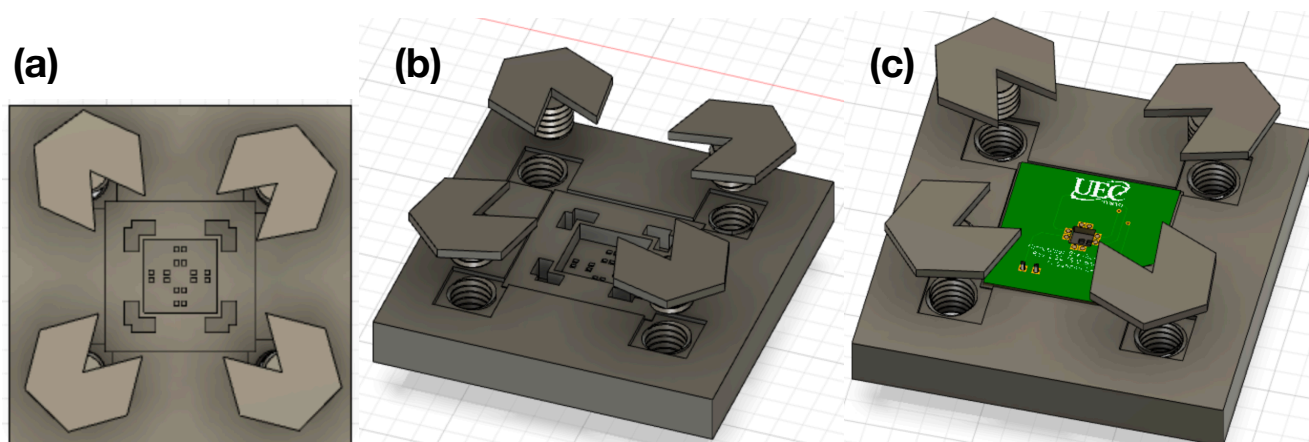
Schematic render of the 3D printed holder for mechanical alignment of the substrate with the PCB. (a) Top view of the holder with four notched, wide base screws, (b) Perspective view of the holder, and (c) Mechanical arrangement of the holder with the PCB described above.
